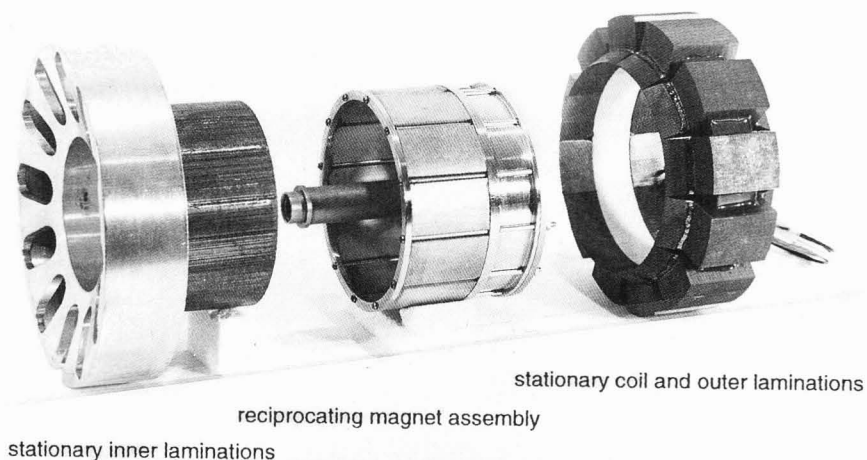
Exploded view of a single window linear motor/alternator. The reciprocating magnet assembly is part of the piston in all types of free-piston machines, including Stirling engines, Stirling coolers, and linear compressors. This particular example is from a linear compressor and is rated at 200 W.
